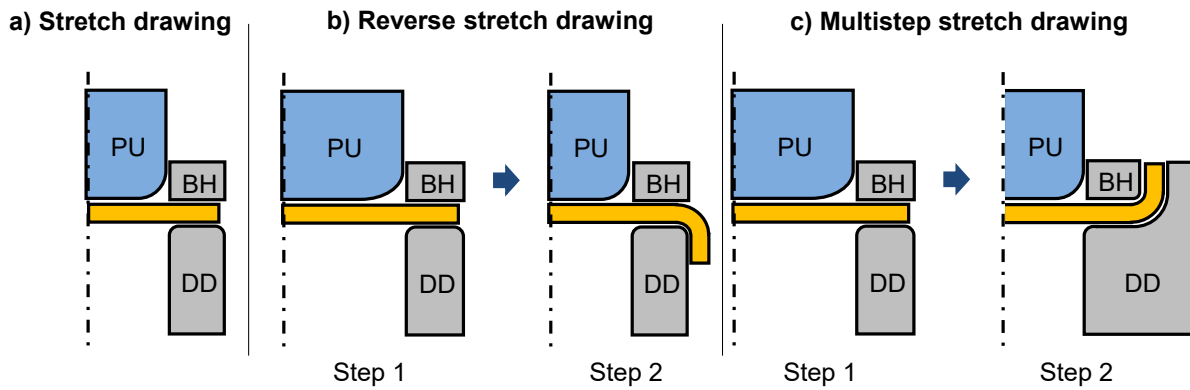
SEQ Figure * ARABIC 1. Schematic illustration of a) stretch drawing, b) reverse stretch drawing and c) multistep stretch drawing.
